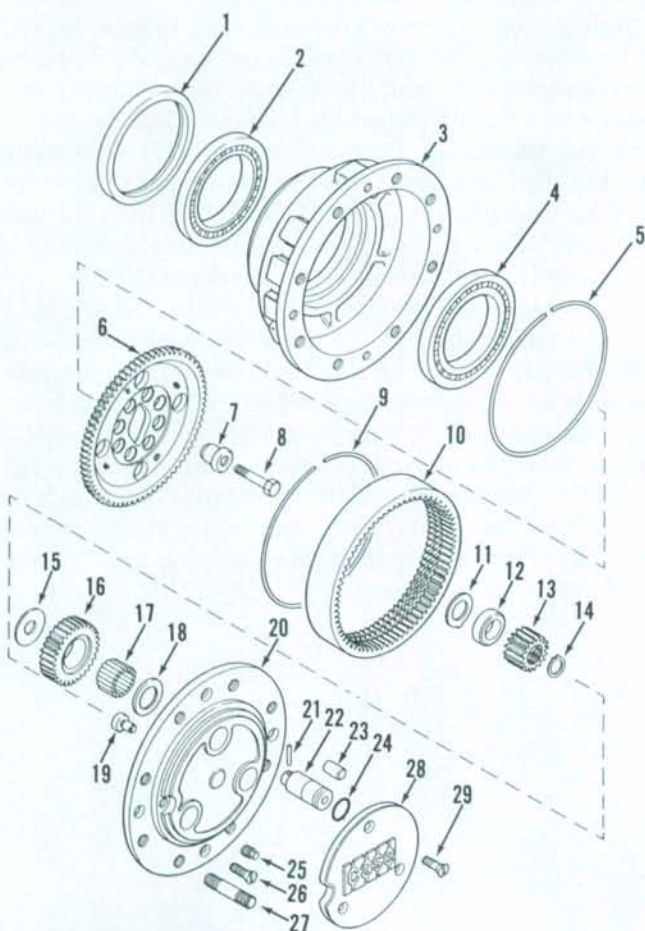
Exploded view of front drive axle wheel hub and planetary assembly.
